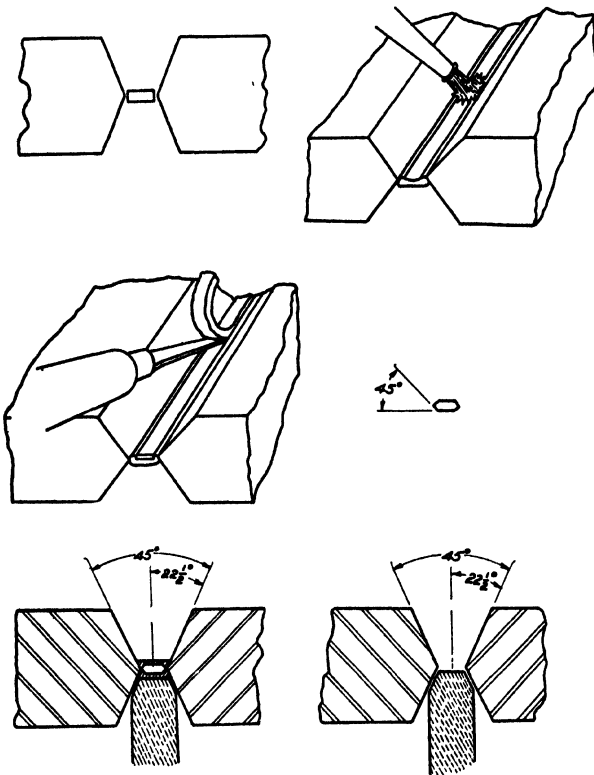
, (top left). Strips welded from one side. Fig. 15, (second from top, left). Chipping weld with chisel. Fig. 16, (top right). Gouging tip on acetylene torch. Fig. 17, (second from top, right). Chipped to diamond shape. Fig. 18, (bottom left). Complete penetration. Fig. 19, (bottom right). Double 25° included angle with opening.
